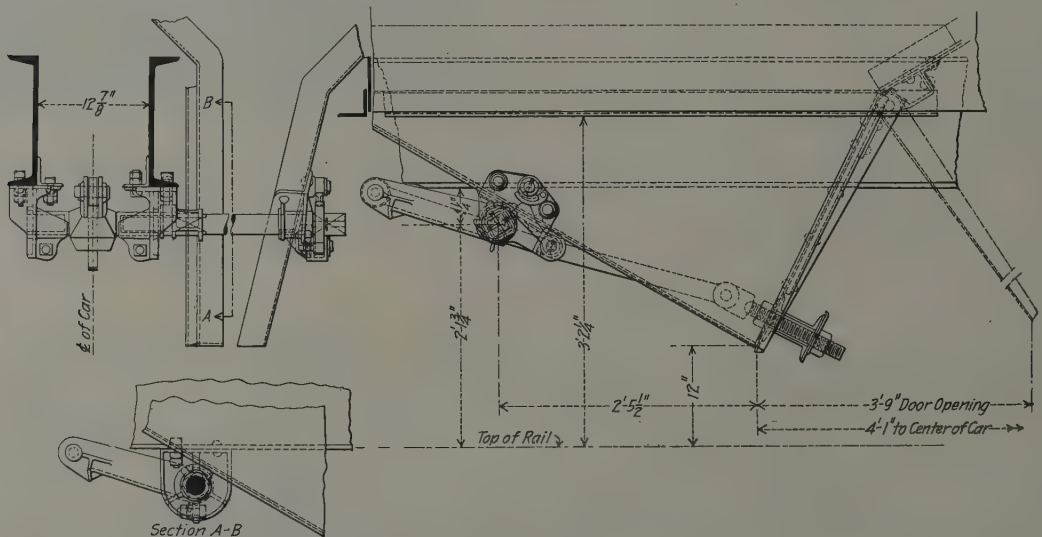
Door Operating Apparatus with Lind Safety Clutch for All-Steel Hopper Car. Pressed Steel Car Company.
